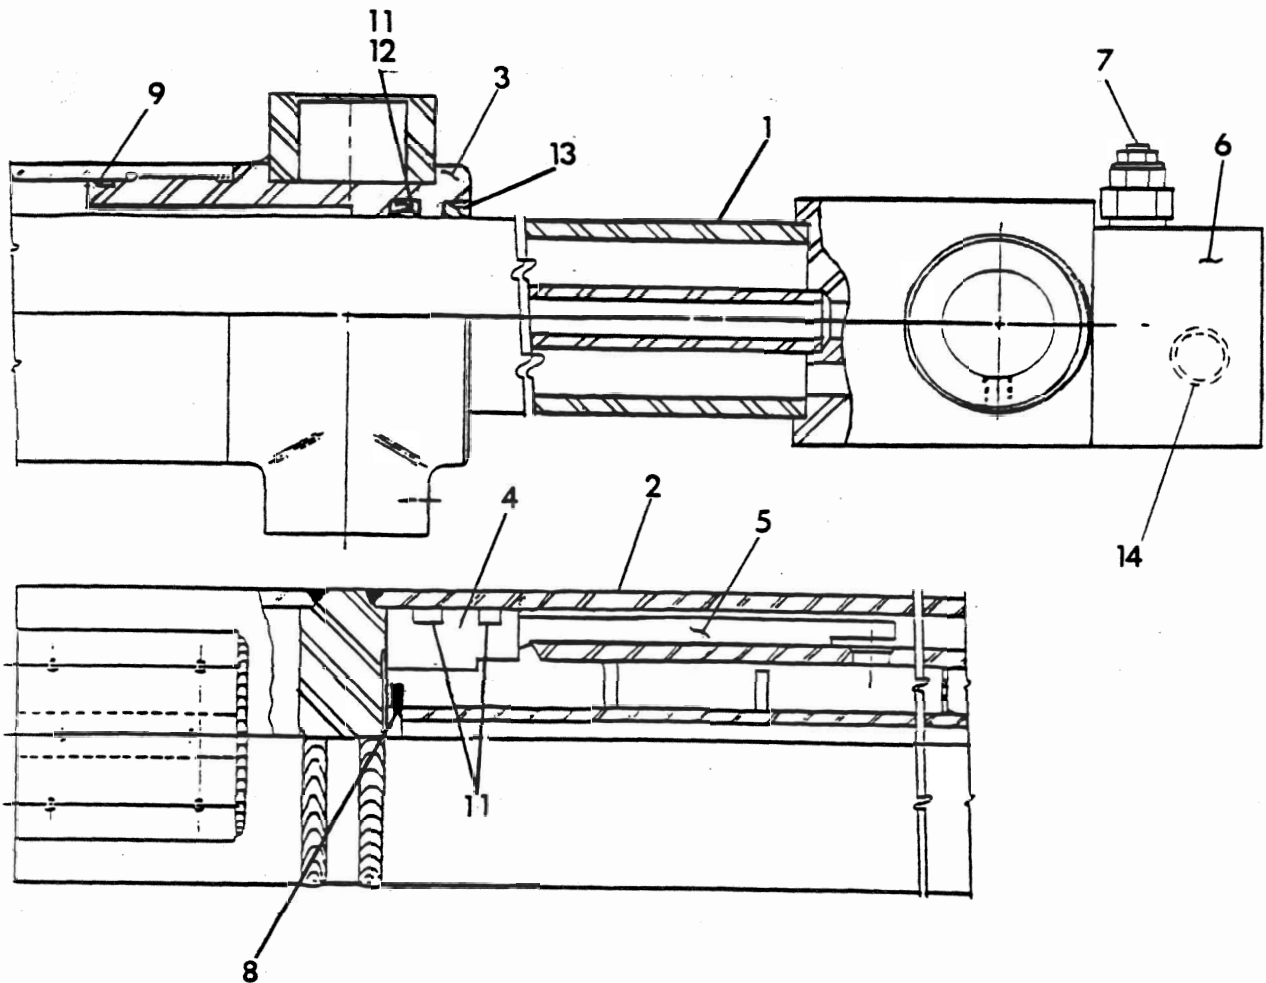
B TOPPING CYLINDER, PARTS BREAKDOWN (58, 68, 76)
